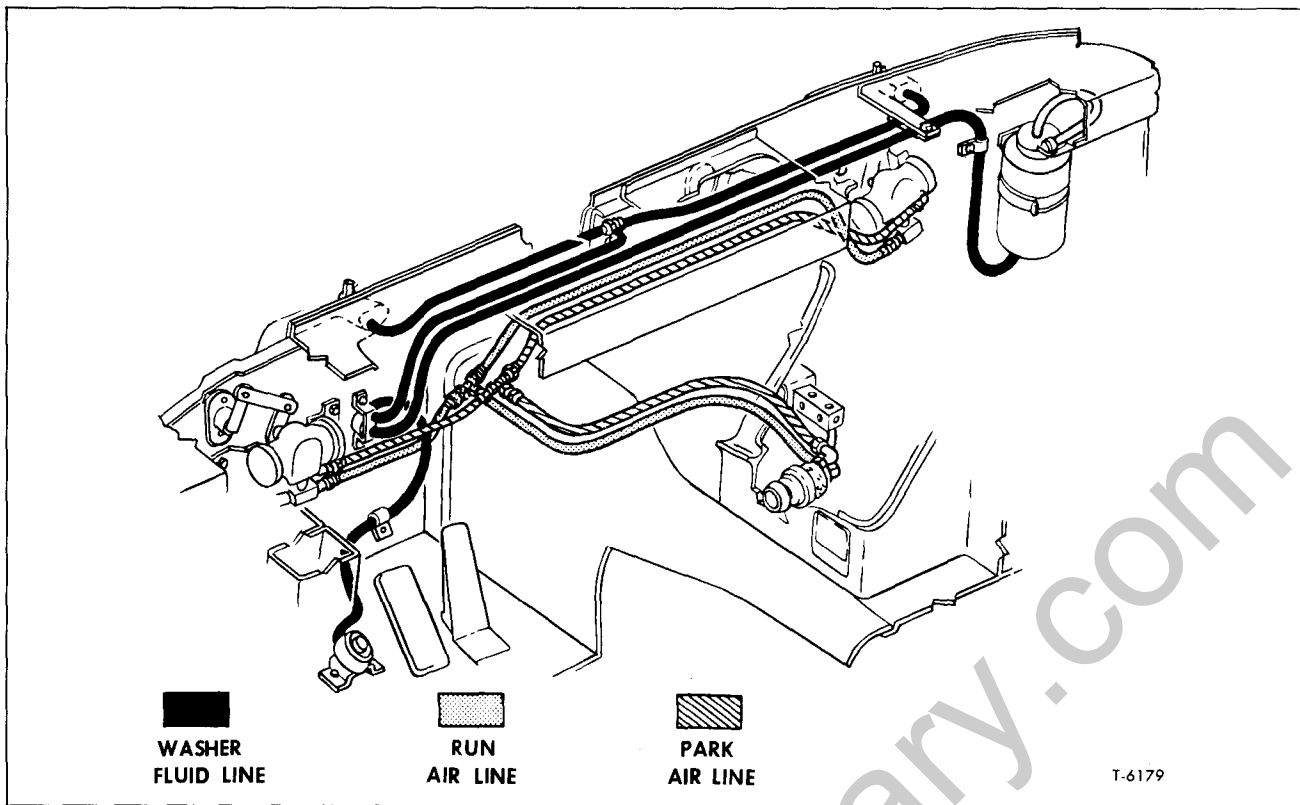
Air-Operated Wiper and Washer Lines (Typical)
